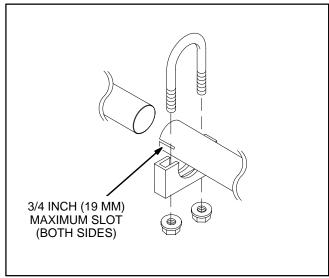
EXHAUST TAILPIPE CONNECTIONS
